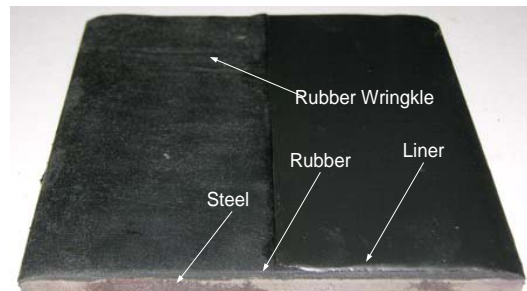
Rubber and Liner Side of Steel/Rubber Adhesive Test Block
